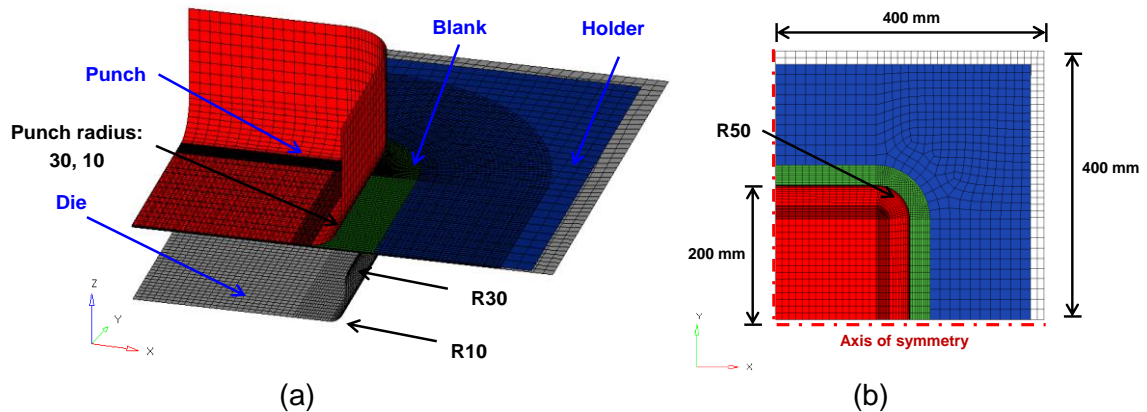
Finite element model for pre-forming analysis: (a) assembly of finite element models; (b) dimension of each part
